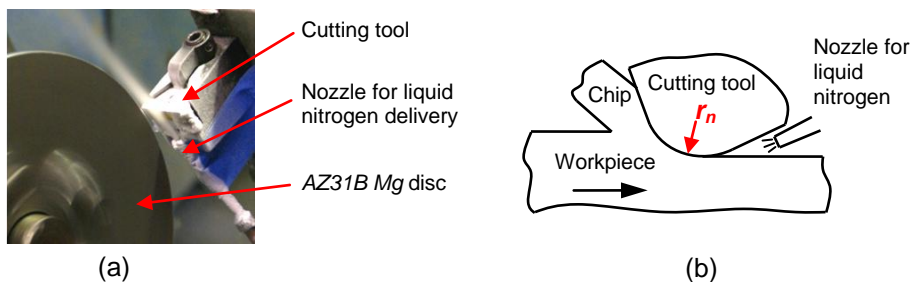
Experimental setup of cryogenic machining: (a) photo (tool approaching workpiece) and (b) schematic diagram.
